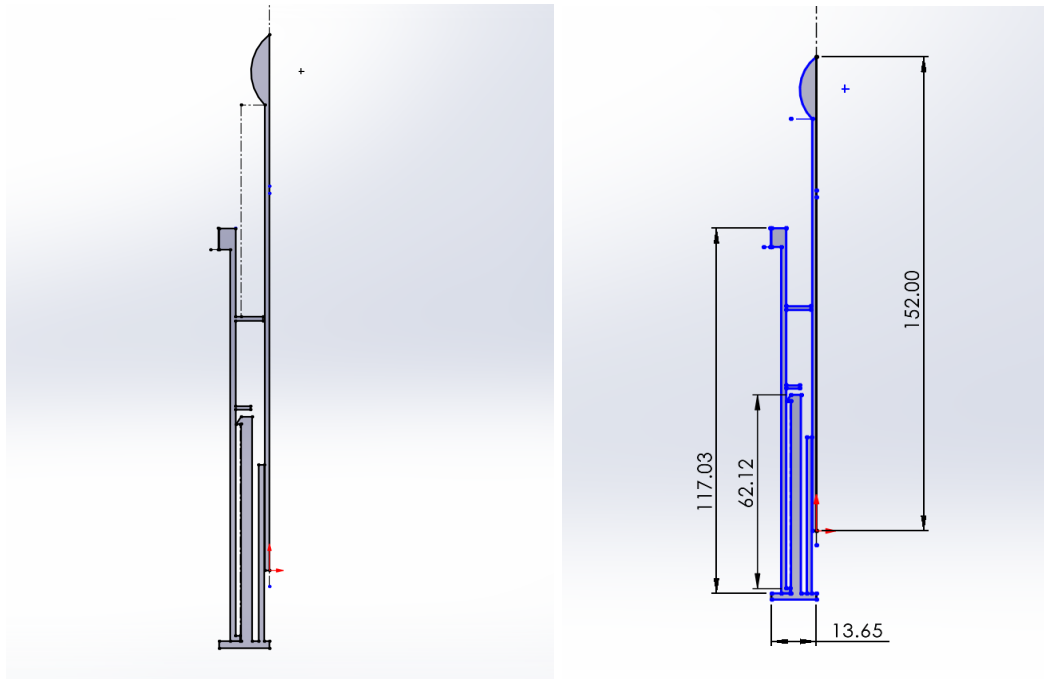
SolidWorks drawing of plunger and body of device centered about the mock swab prior to being revolved.
